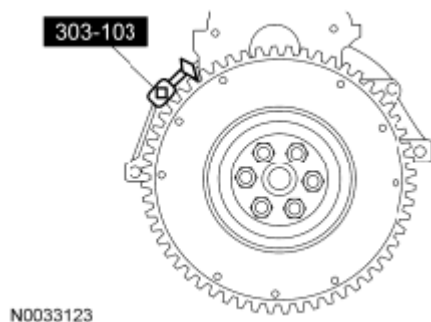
Identifying Flywheel Holding Tool On Flexplate
